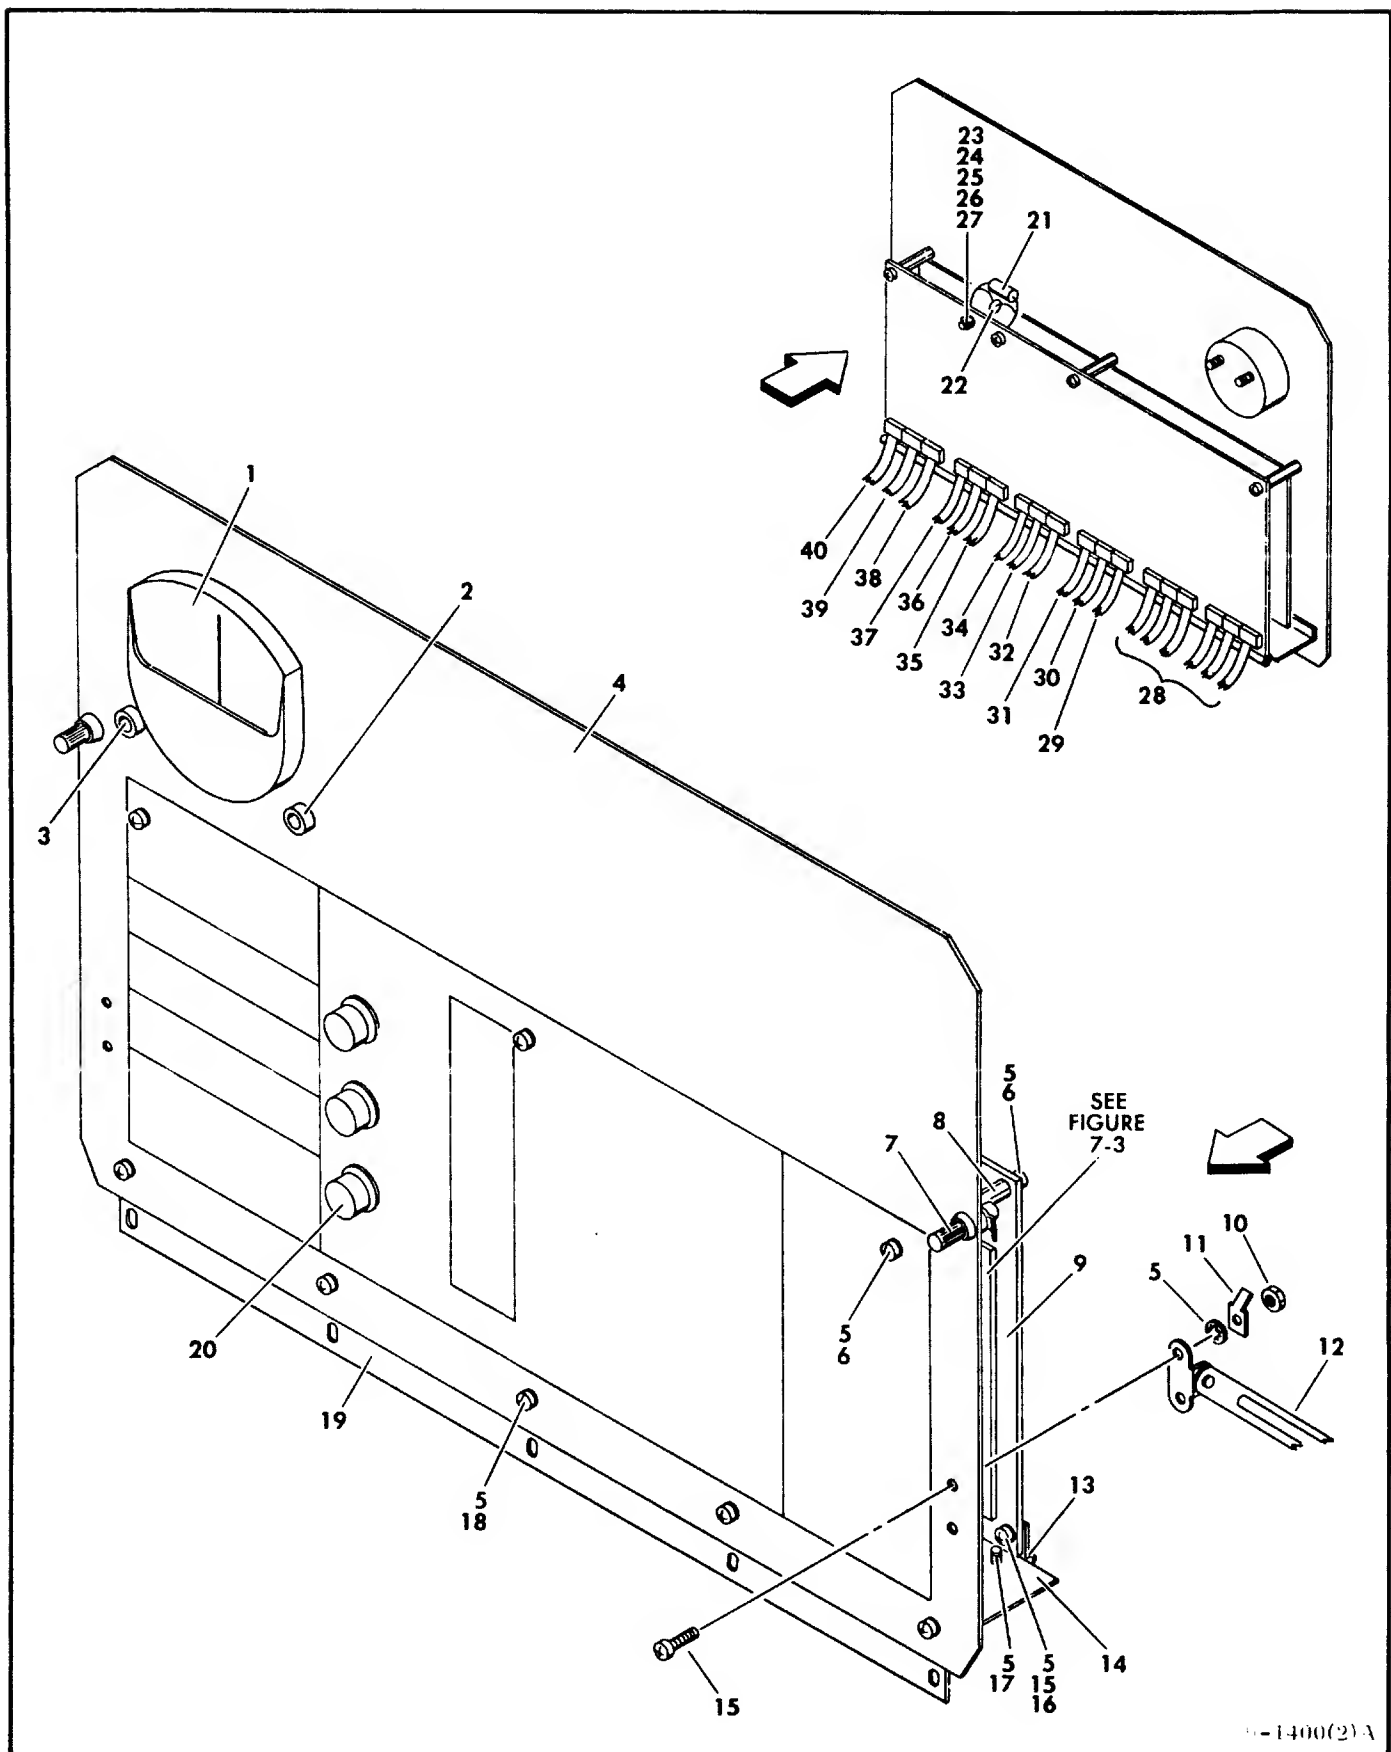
FINAL ASSEMBLY, STANDARD PACKAGE
